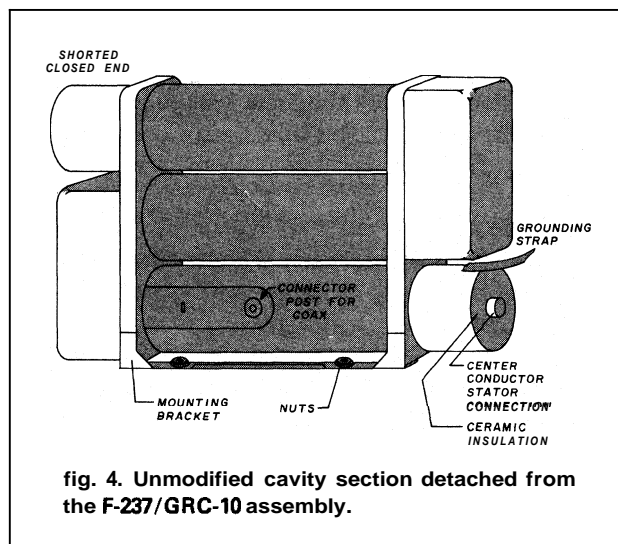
Unmodified cavity section detached from the F-237/GRC-10 assembly.
